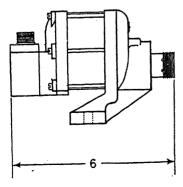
ELECTRICAL ENGINE-SPEED INDICATOR (SENSITIVE TYPE)
